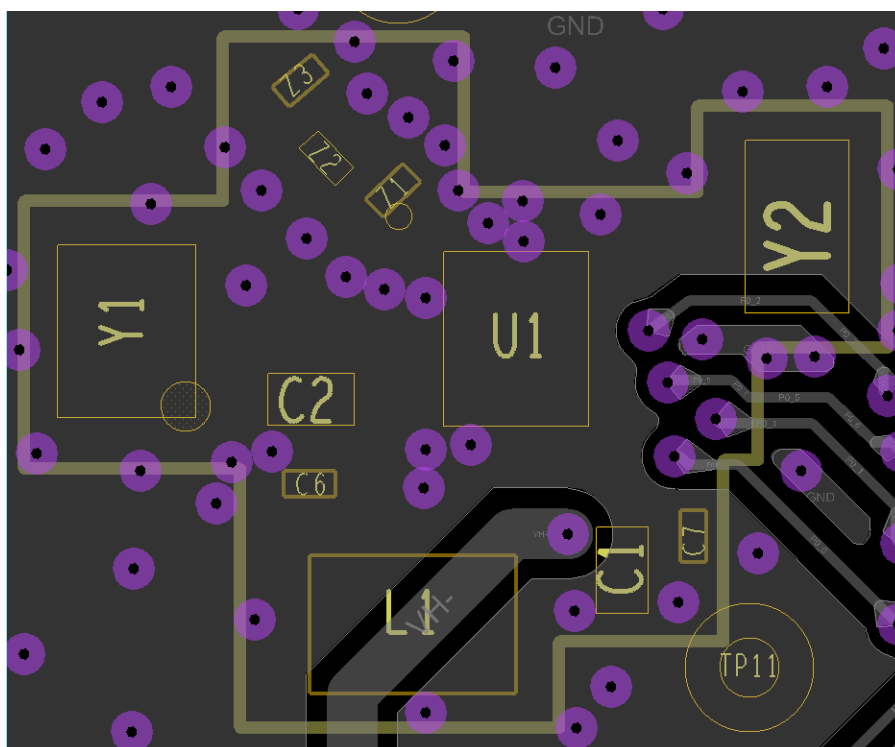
WLCSP17 PCB Placement and Routing - INT2 Layer
